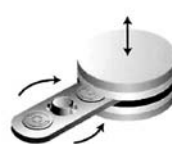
Examples of feed mechanisms for double-disc grinders.
